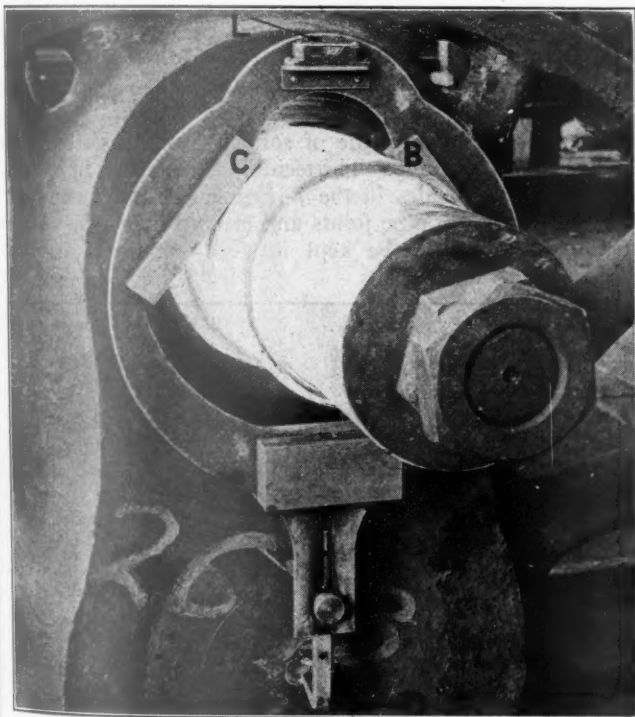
Jig for Plumbing Crank Pins when Laying Out Eccentric Keyways
